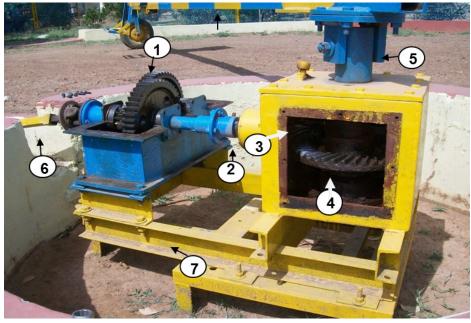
Gear unit of power transmission system, 1. Spur gears, 2. Bearing housing, 3. Pinion gear, 4. Crown gear, 5. Vertical input shaft, 6. Universal coupling and telescopic shaft and 7. Frame.
